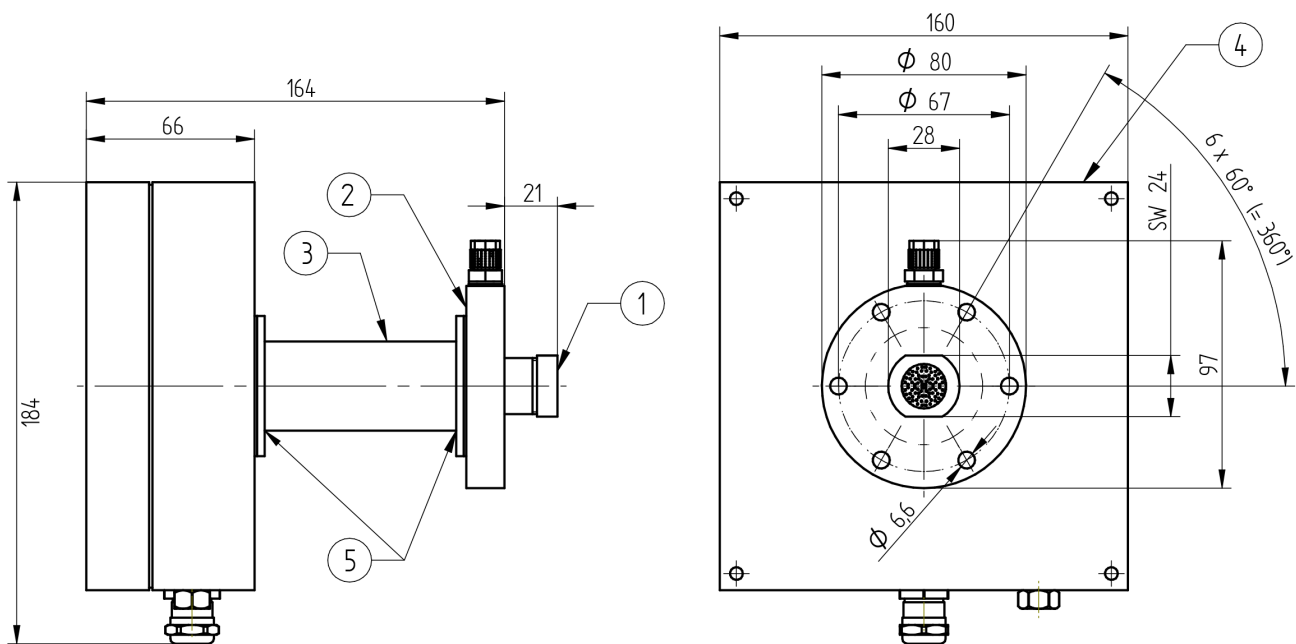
Dimensional drawing Combination Probe KS2DNO_x
